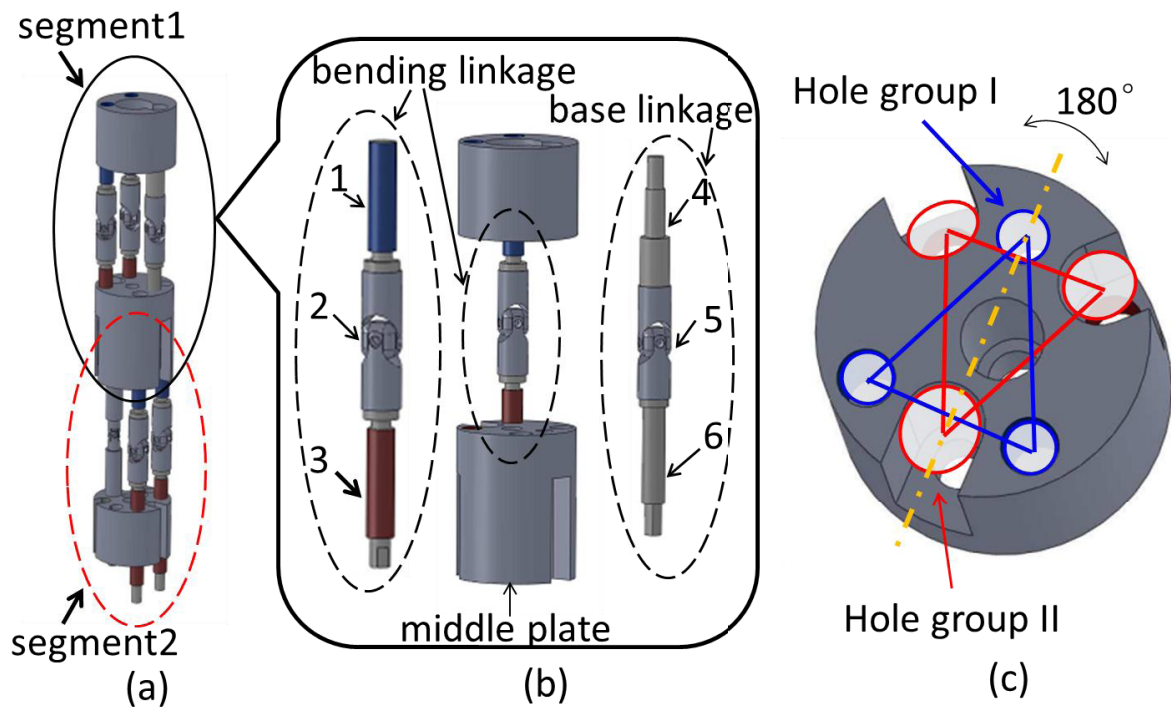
Mechanical configuration of bendable joints, (a) bendable joints, (b) nomenclature of mechanical parts, (c) the distribution of channels in the middle frame. 1) Left-handed screw, 2,5) universal joint, 3) right-handed screw, 4,6) support rod.
